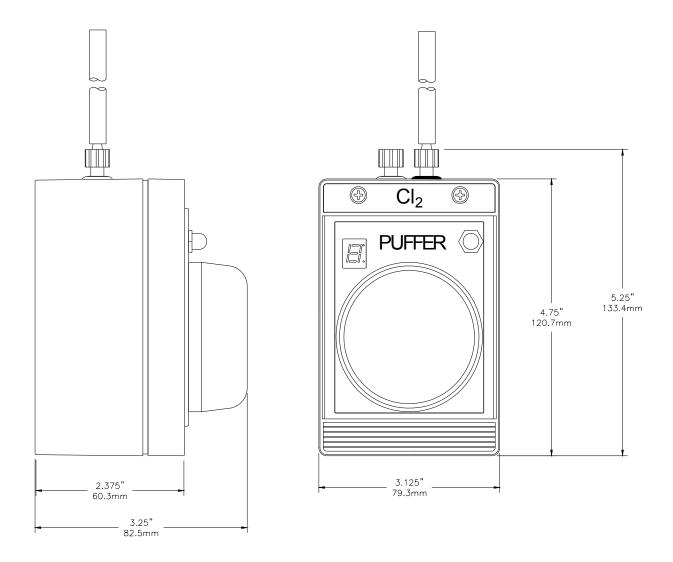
A24 Portable Generator Dimensional Drawing (ATI-0755)
